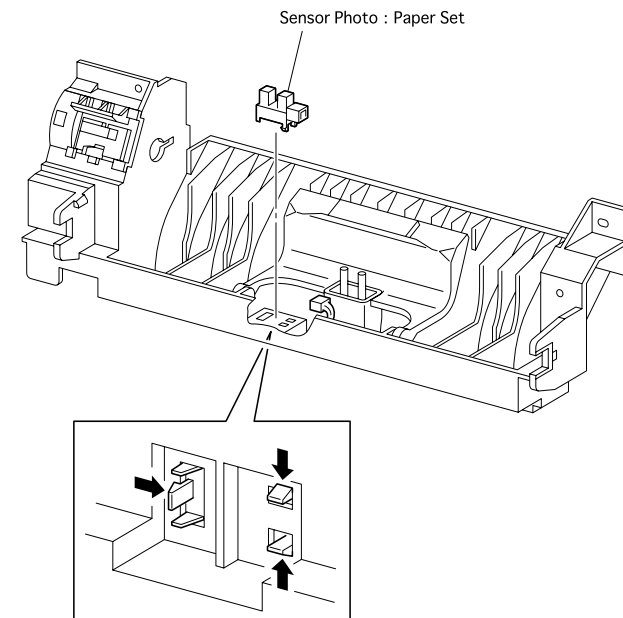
Removal of Sensor Photo: Paper Set (2)
